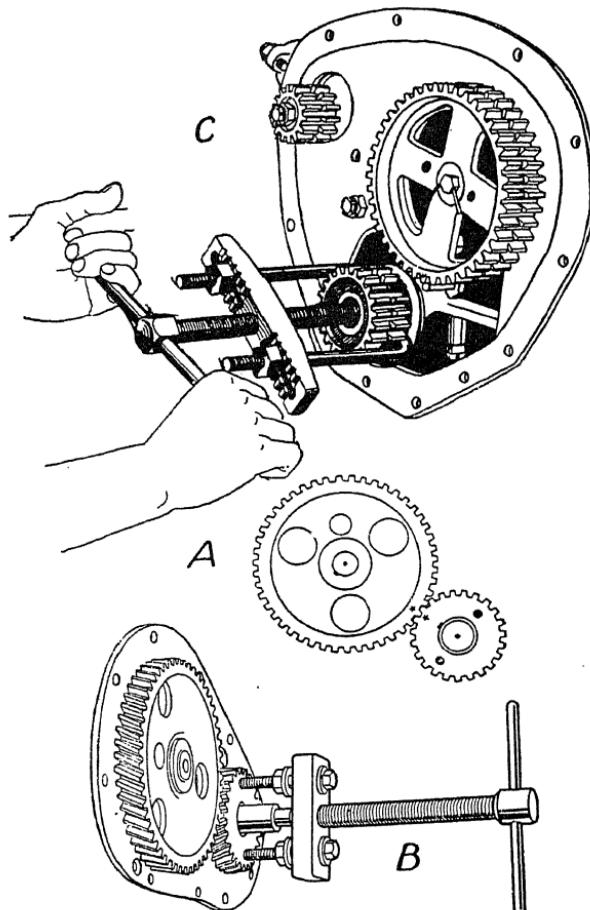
Timing-Gear Marks and Use of Gear Puller for Pulling Crankshaft Gear
